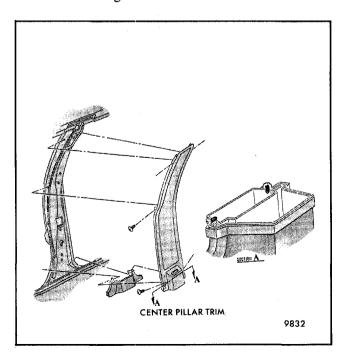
Center Pillar Trim Attachment - A Styles
